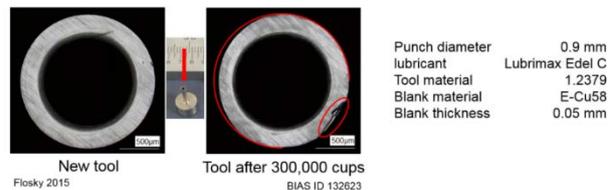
Comparison between a new tool and a tool after producing 300,000 micro cups [2]
